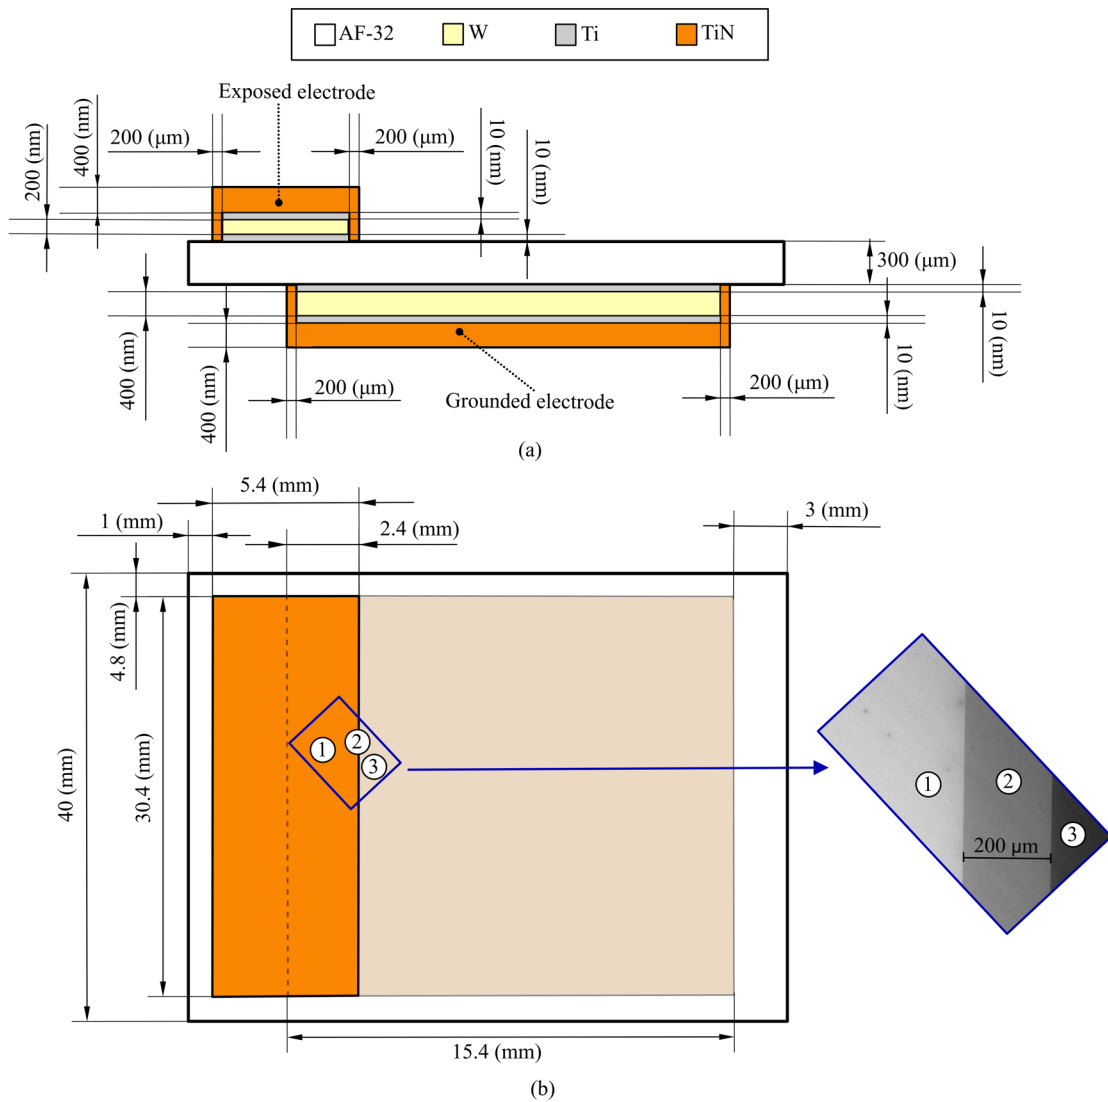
Actuator geometrical details and dimensions: (a) Cross sectional view; (b) Top view (a SEM image detail is also reported).
